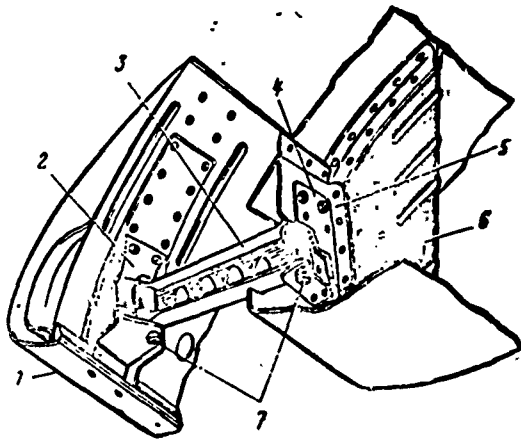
Slat attachment point to the wing: 1 - slat; 2 - bracket on slat; 3 - actuating arm of slat; 4 - mounting bracket of actuating arm; 5 - diaphragm; 6 - reinforced leading edge of wing; 7 - link bolts.
